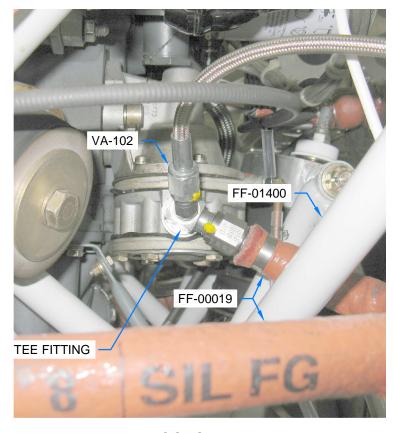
HOSES AT FUEL PUMP (TRI-GEAR - LEFT SIDE VIEW)
